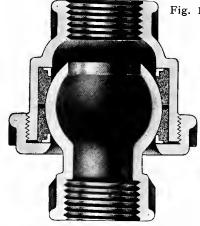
Flexible Joint. Barco Brass & Joint Company.
